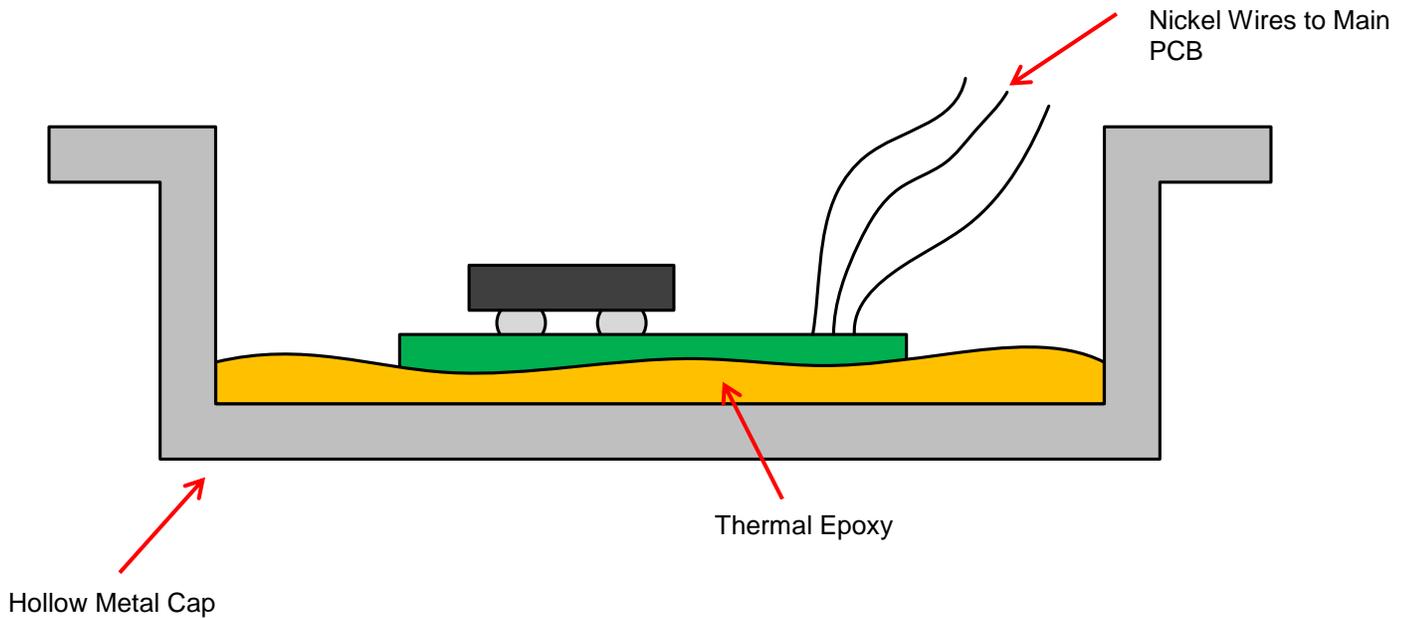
Side View of Metal Cap with Mounted Remote PCB
